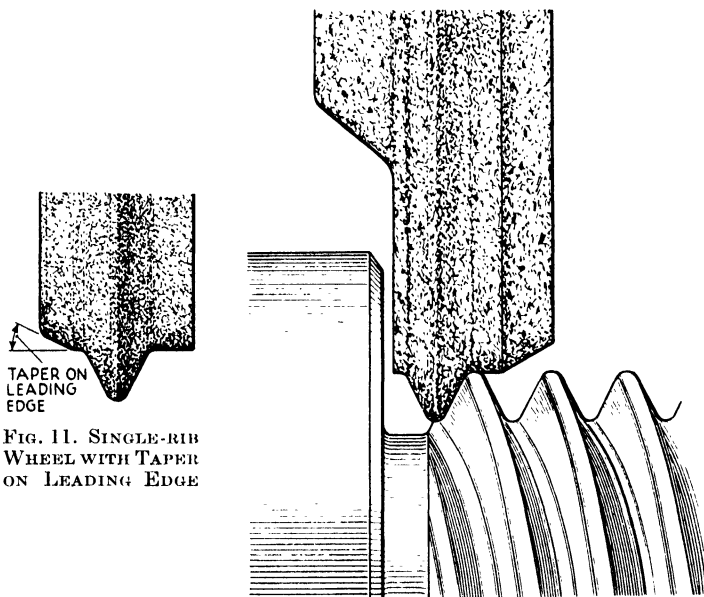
SINGLE-RIB WHEEL CUT AWAY TO PERMIT GRINDING THREAD CLOSE TO SHOULDER
